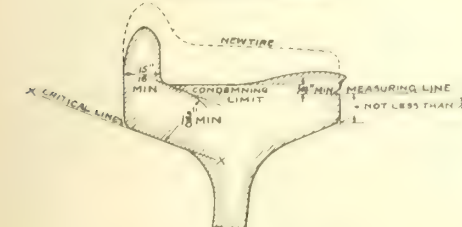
STEEL WHEEL MINIMUM DIMENSIONS FOR WROUGHT STEEL AND STEEL TIRE WHEELS
